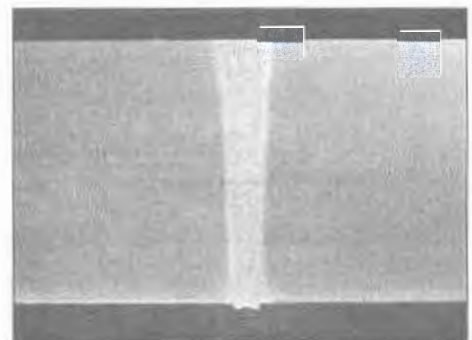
Butt weld of X70 steel ($t = 11.2$ mm, $P_L = 10$ kW, $v_w = 2.2$ m/min)
